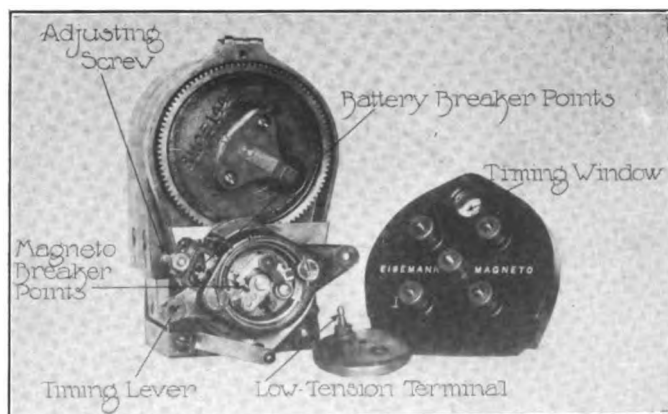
Eisemann Type E M Magneto, Showing Magneto and Battery Make and Break Mechanism.
